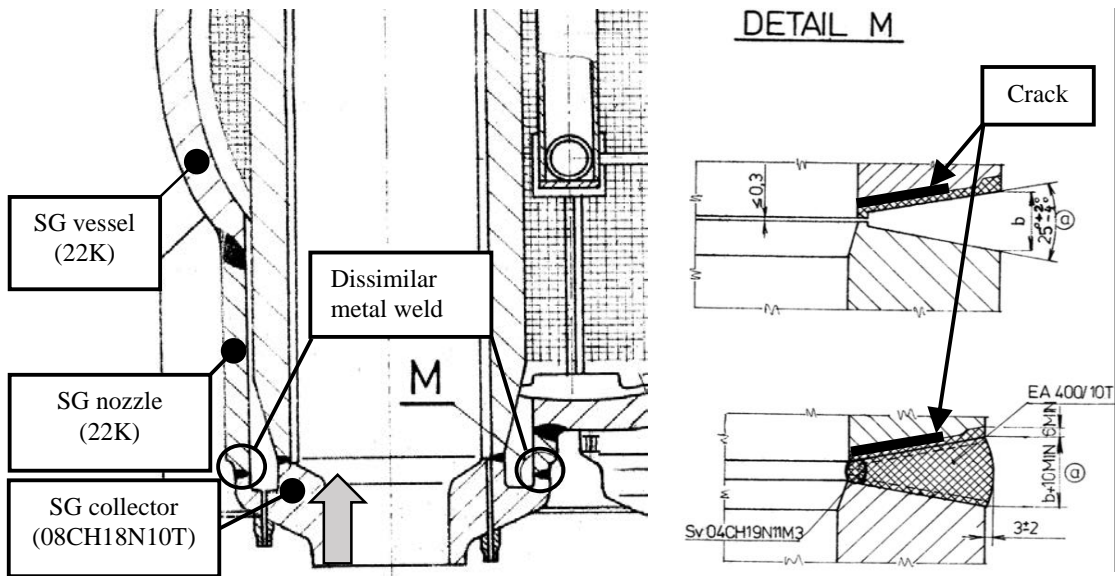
PGV-440 steam generator collector's weld area.
